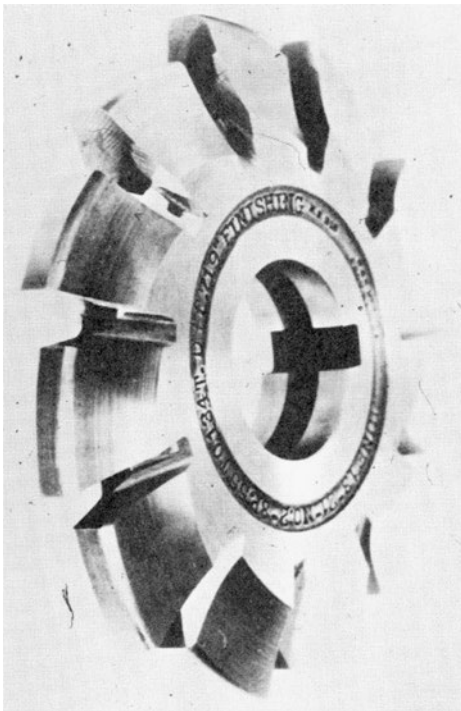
Brown & Sharpe form relieved gear cutter.
